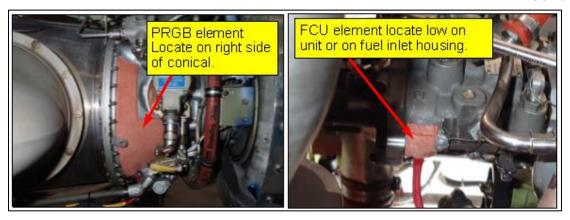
PRGB element P/N: TEP2659- locate on right side as shown. Common alternate TEP3035-. FCU element p/n: TEP2682- locate low on unit or on casting near fuel inlet fitting, use supplied pressure block TU02855 when needed, refer instruction TN02855.
